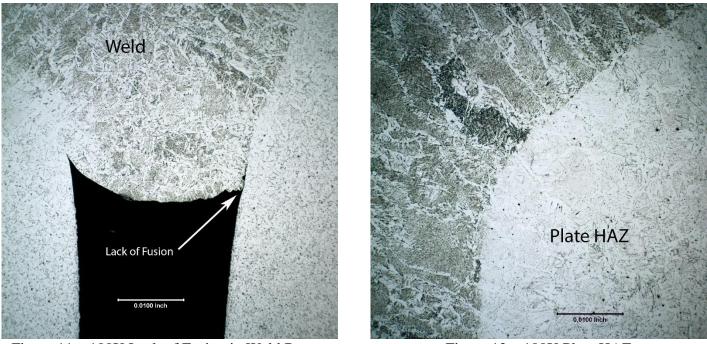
100X Lack of Fusion in Weld Root – Sample 1
